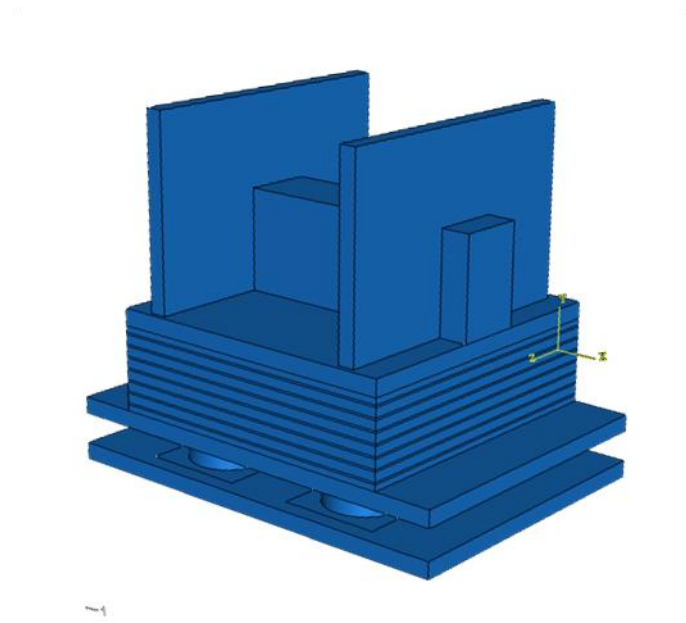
3D CAD of BBB Load Cell Bearing Assembly
